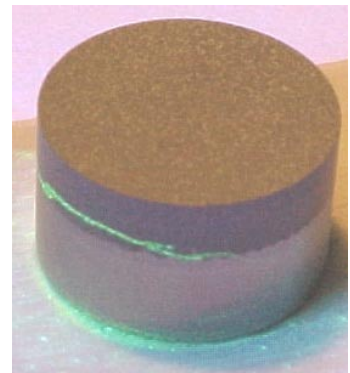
Ultraviolet dye-penetrant test showing crack in PDC with a .120-in thick diamond layer.
